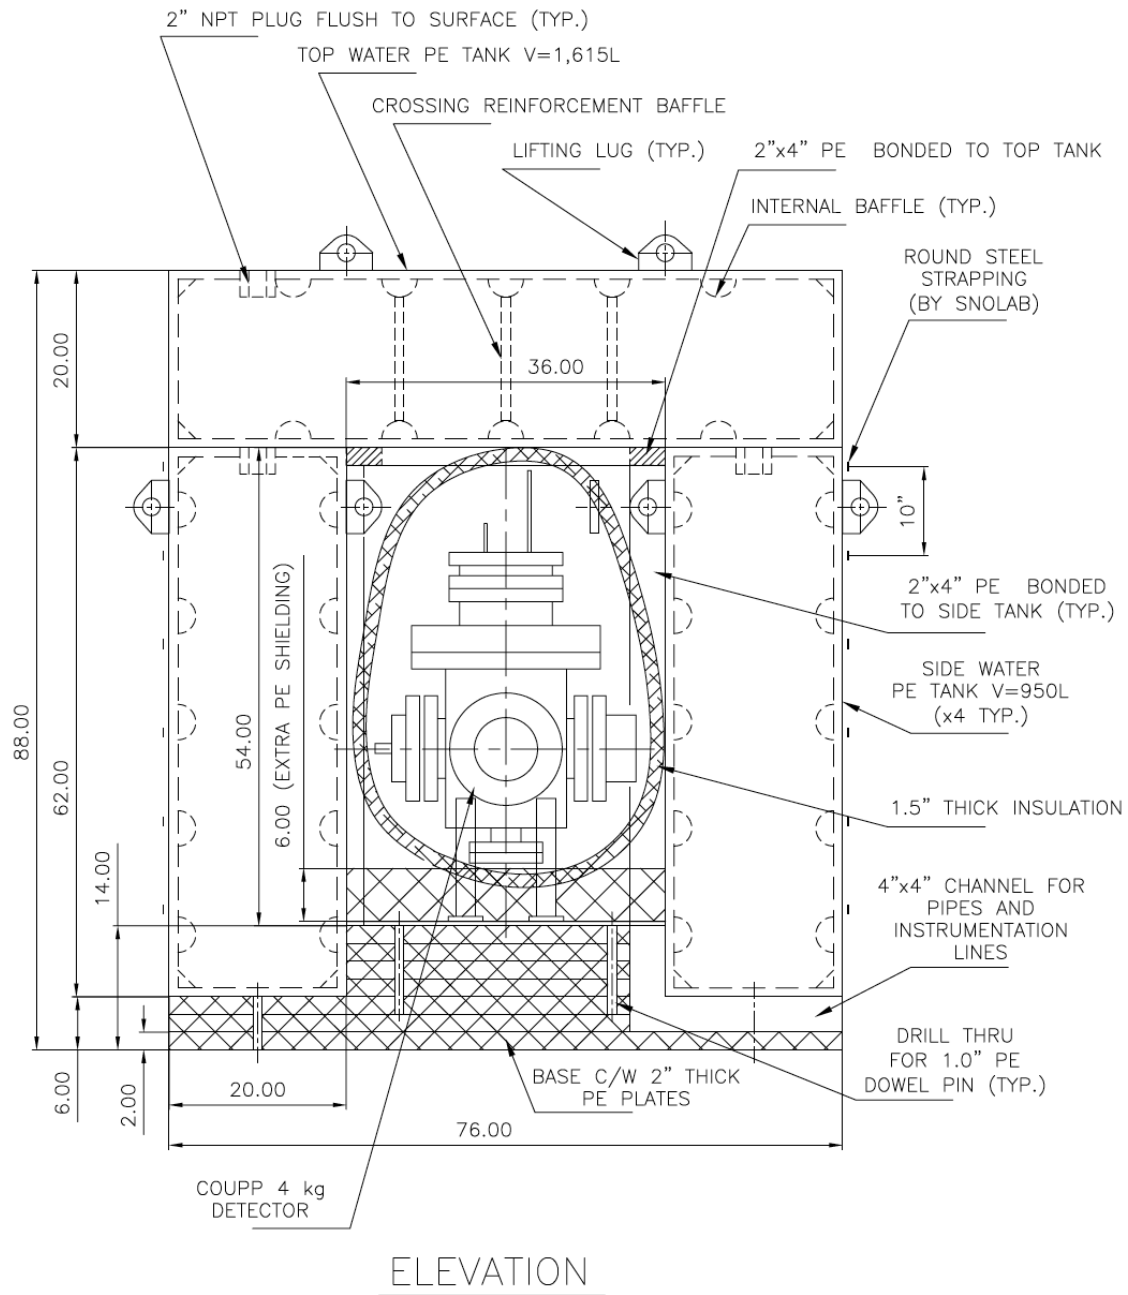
An Elevation Drawing showing the COUPP-4kg bubble chamber within its polyethylene/water shielding.
